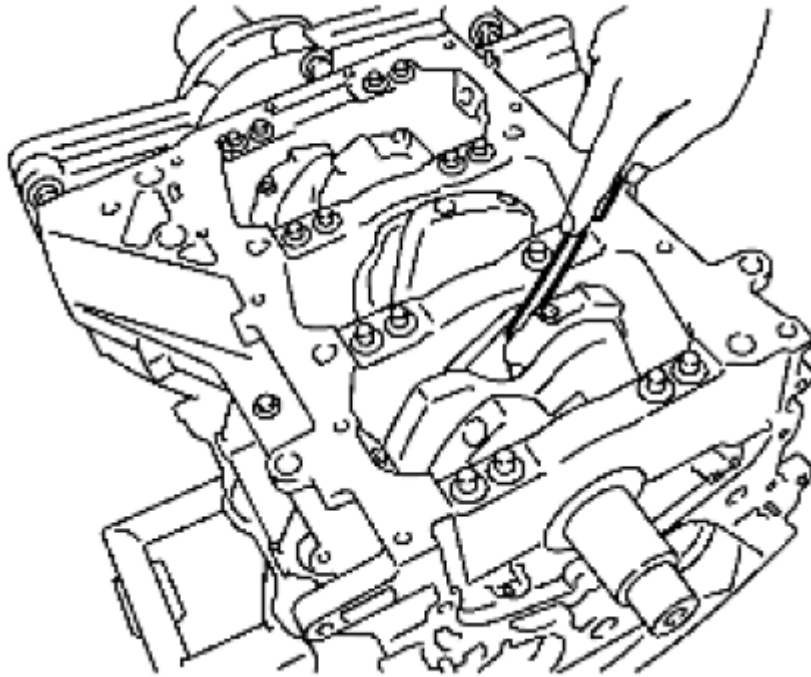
Measuring Side Clearance Between Connecting Rod And Crankshaft Arm With Feeler Gauge
